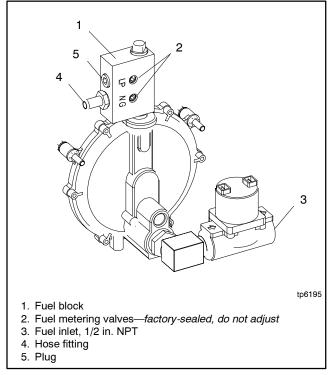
Fuel Block Connections, Natural Gas System Shown
